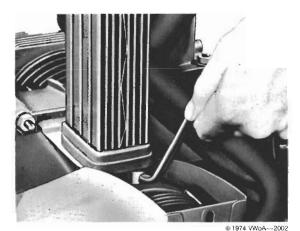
Removing one of two nuts under left-hand side of oil cooler (or intermediate flange).
